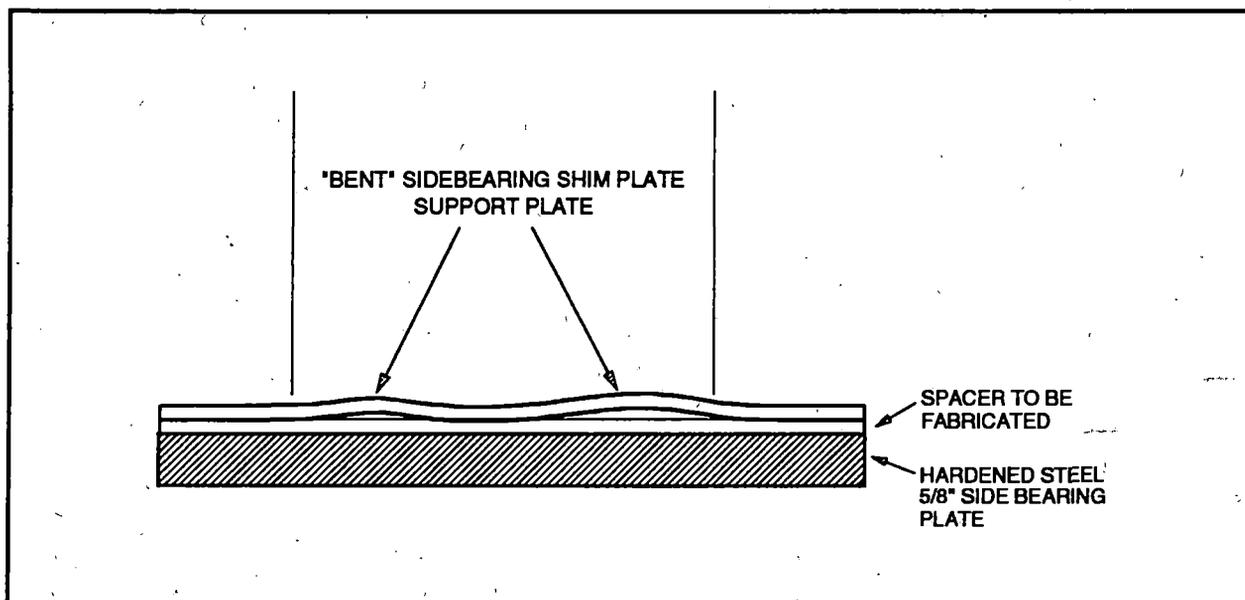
Uneven Side Bearing Plate Support Surface to Be Repaired
